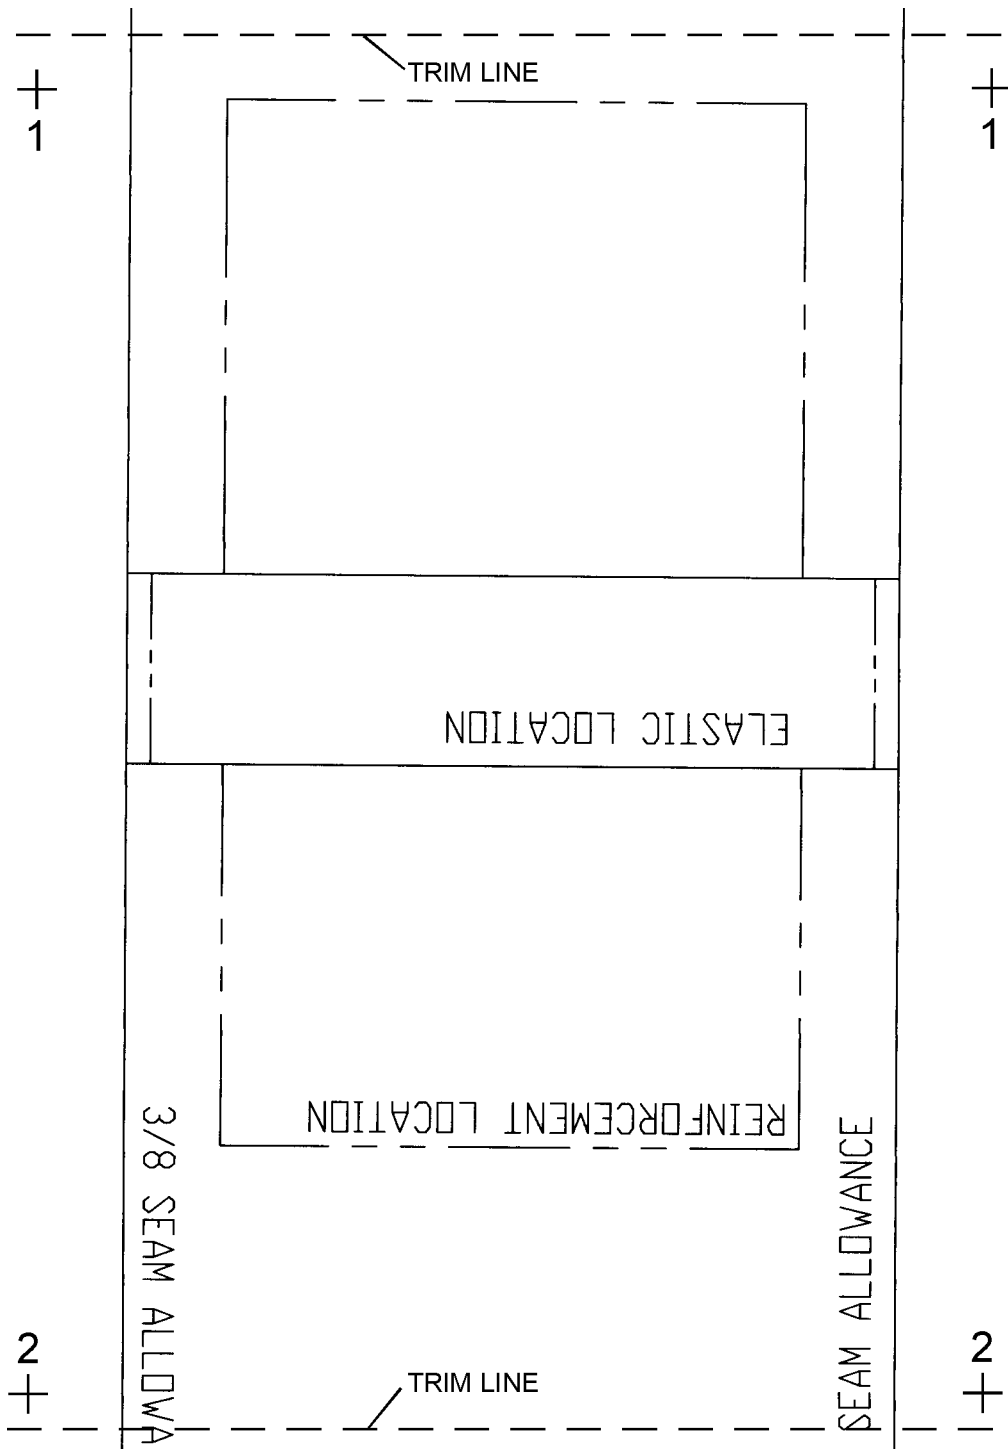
H. Flare Pocket Front Side Panel Pattern (Sheet 2 of 5)
